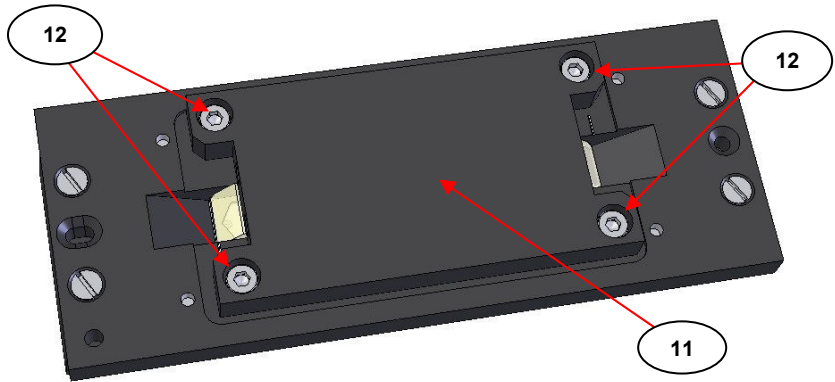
Underside View of Thermostabilised Flow Through Top Plate Assembly
